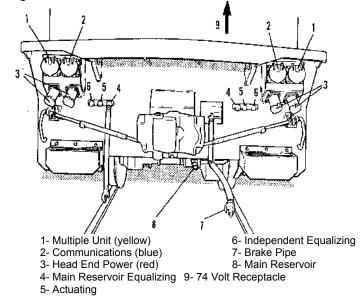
End Connections - Rear of Locomotive 3-16
